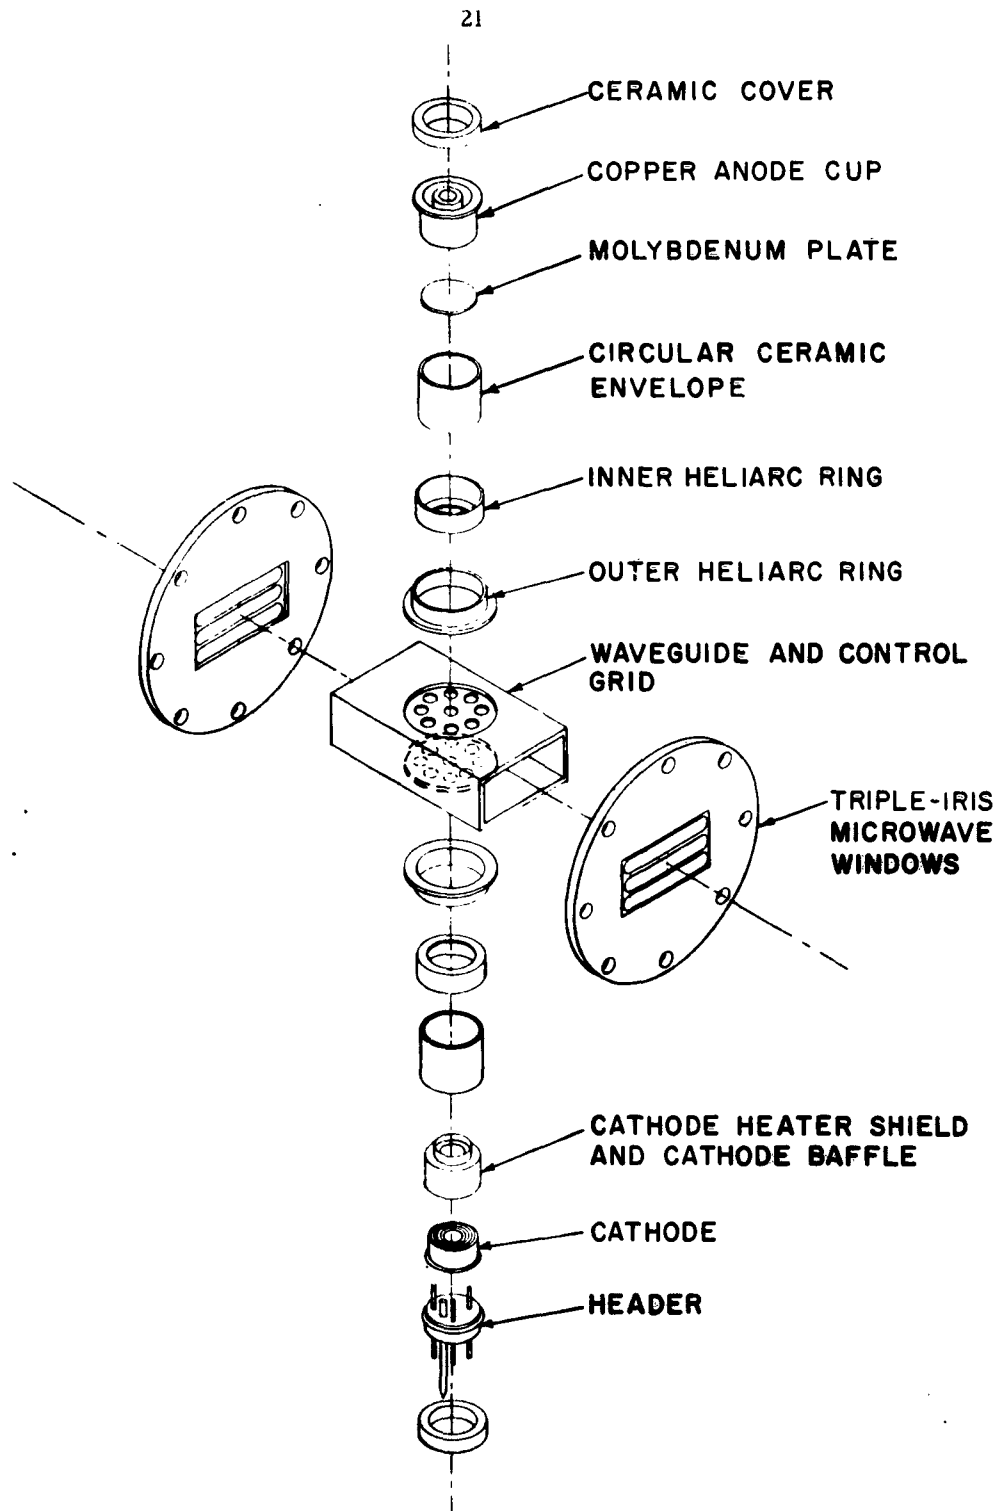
EXPLODED VIEW - MICROWAVE LOW PRESSURE GAS DISCHARGE SWITCH TUBE
